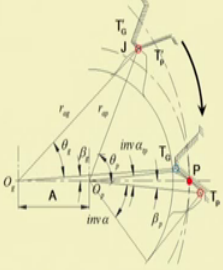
'Tip Interference' in Involute Internal Gearing. (During engagement- Gear is Driver)
